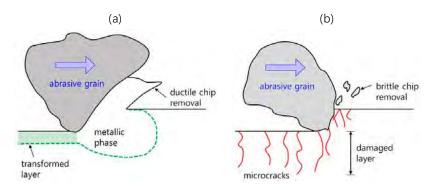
Schemes of cutting brittle materials in (a) ductile mode and (b) brittle fracture, from [158]
